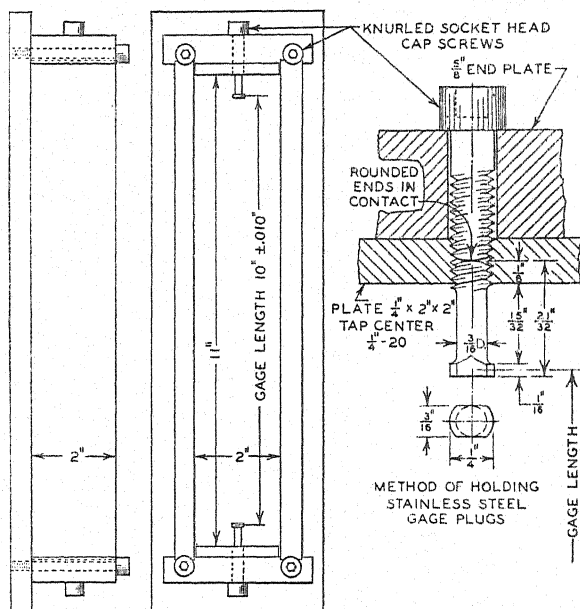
Mold for Horizontal Casting of Prismatic Cement Mortar Specimens.
